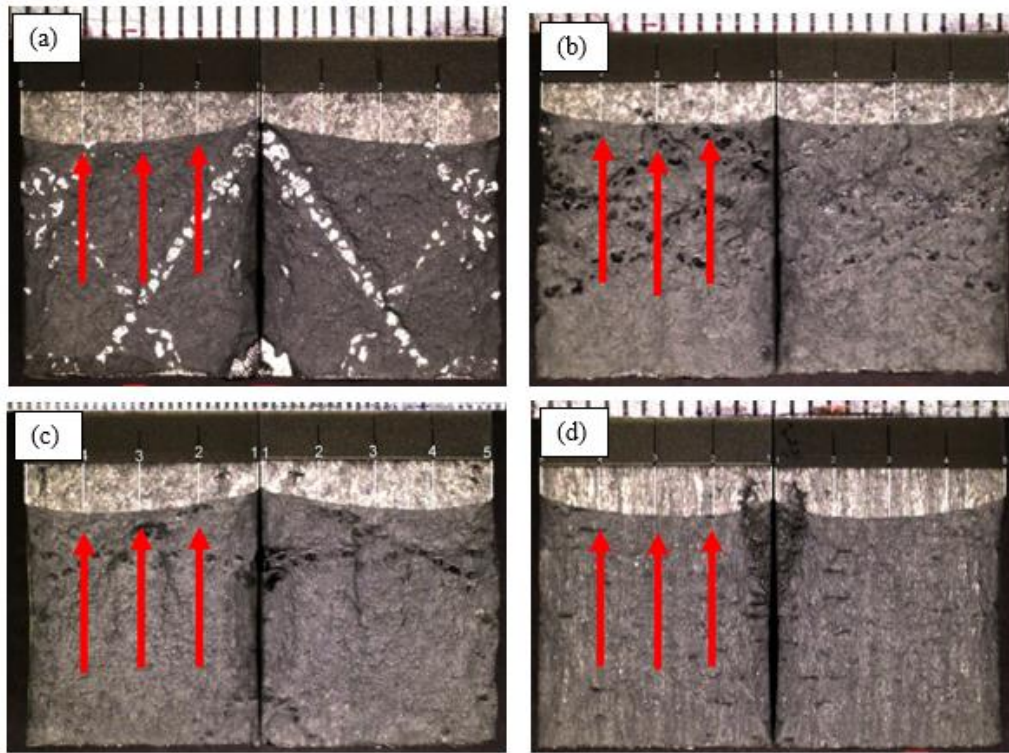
Representative of the fracture toughness specimen fracture surfaces of 00T (a), 30T (b), 45T (c) and 90T (d) respectively.
